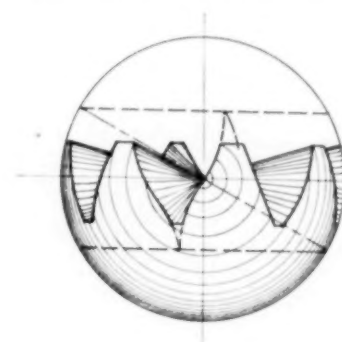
THE INVOLUTE CROWN GEAR (GRANT)
